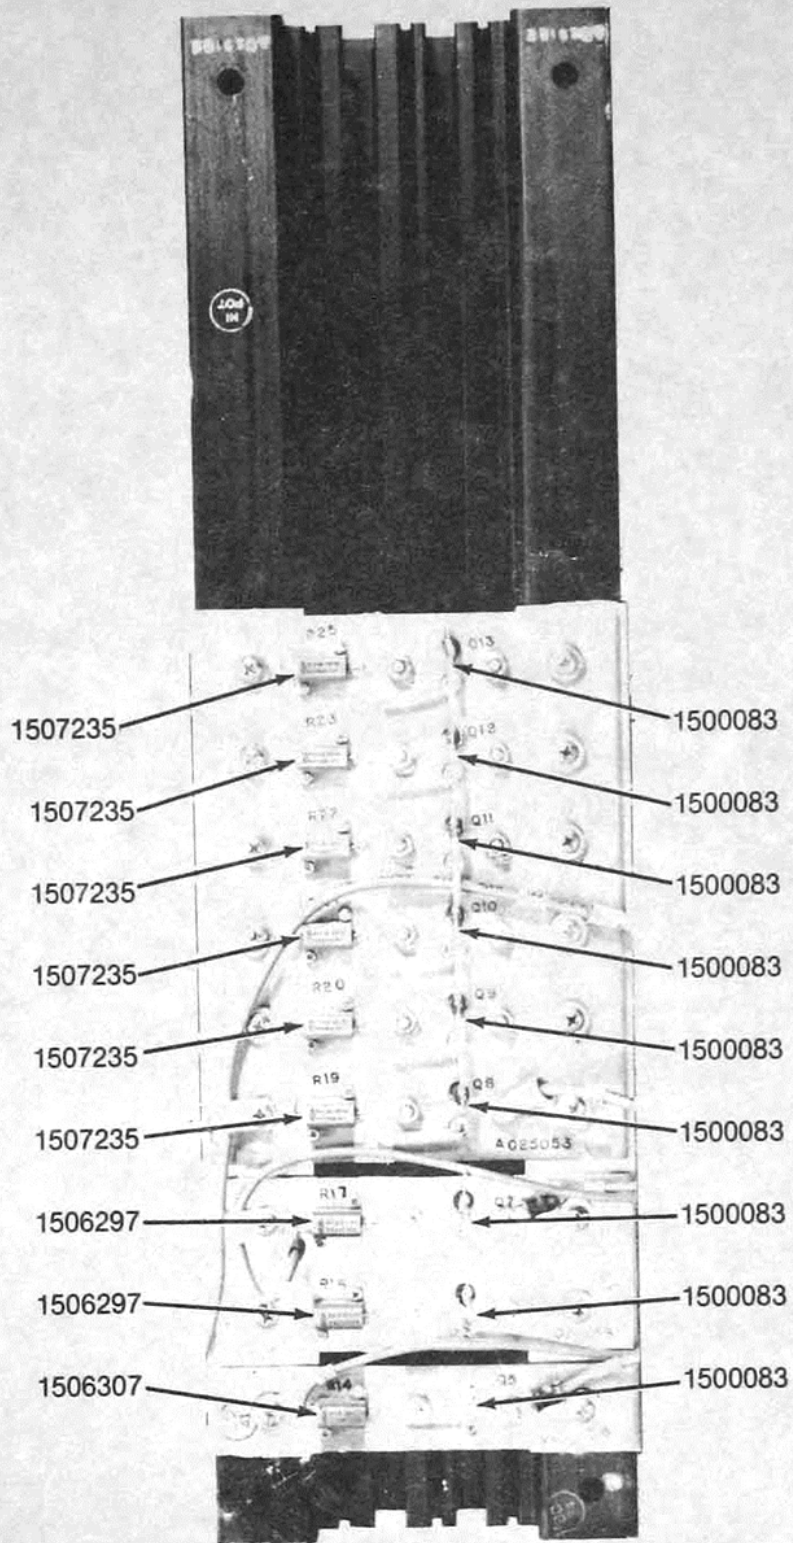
Regulated Power Supply Heat Sink and Transistor Assembly
